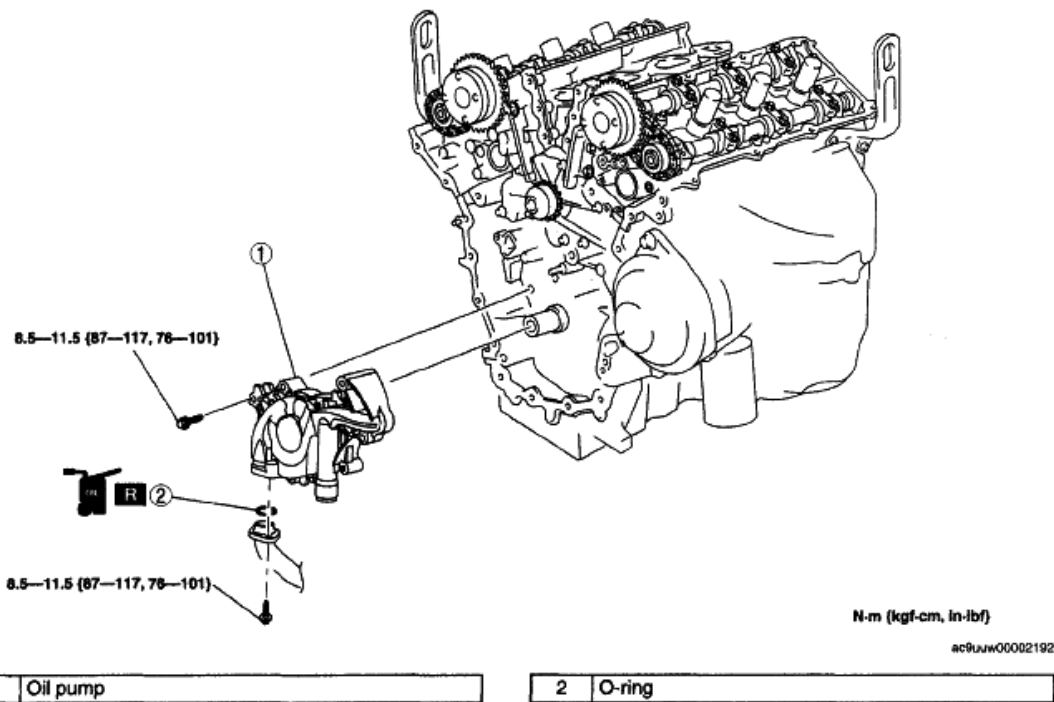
Identifying Oil Pump And O-Ring With Torque Specifications
